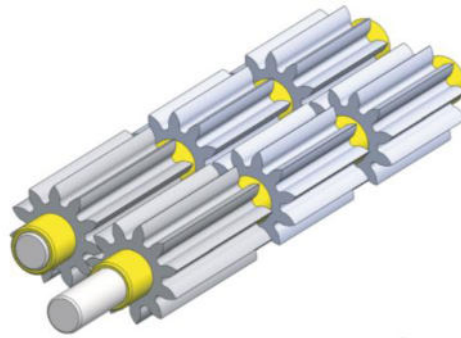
Driven and driven shaft of the pump under consideration of multistage gear pumps with external engagement [10]
